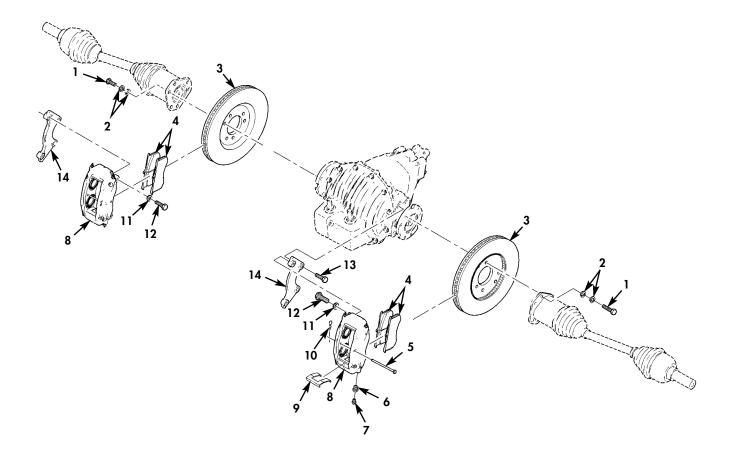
Rear Service Brake Caliper Assembly (Serial Number 300000 and Above).
